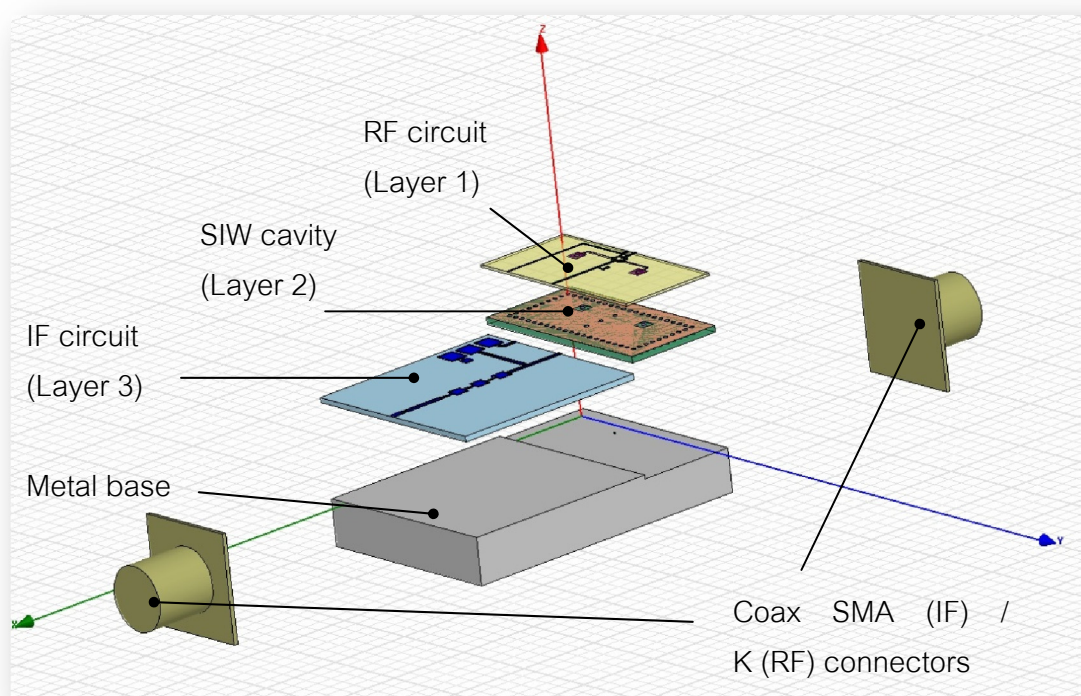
3D illustration in explosion view for the proposed SOM.
